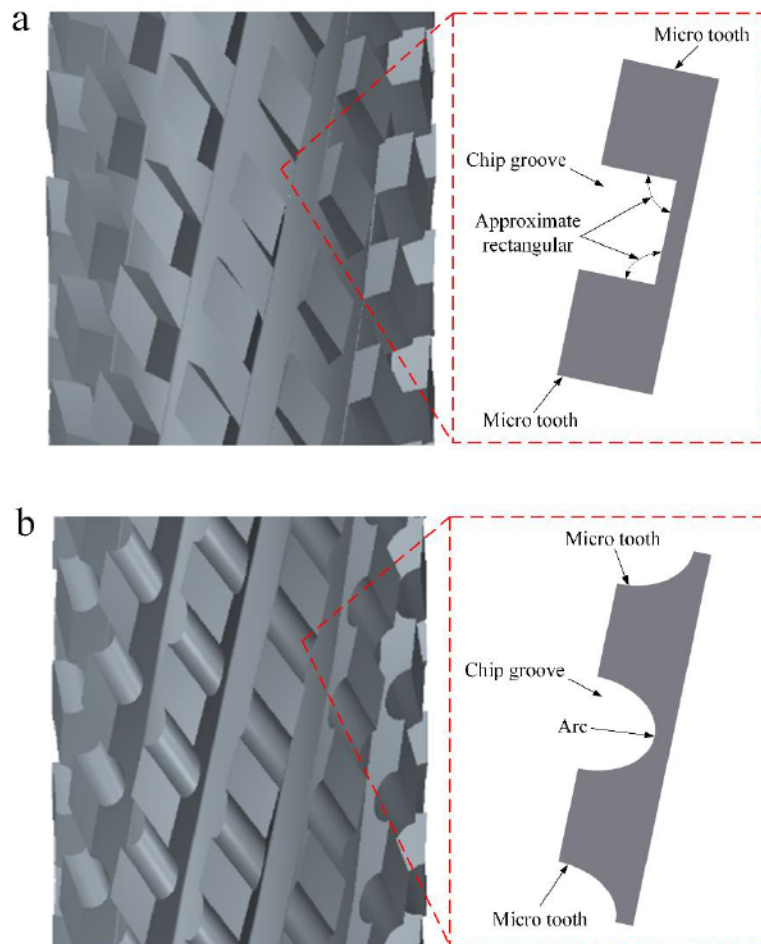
Multi-tooth milling tools with different section shape of the chip groove
